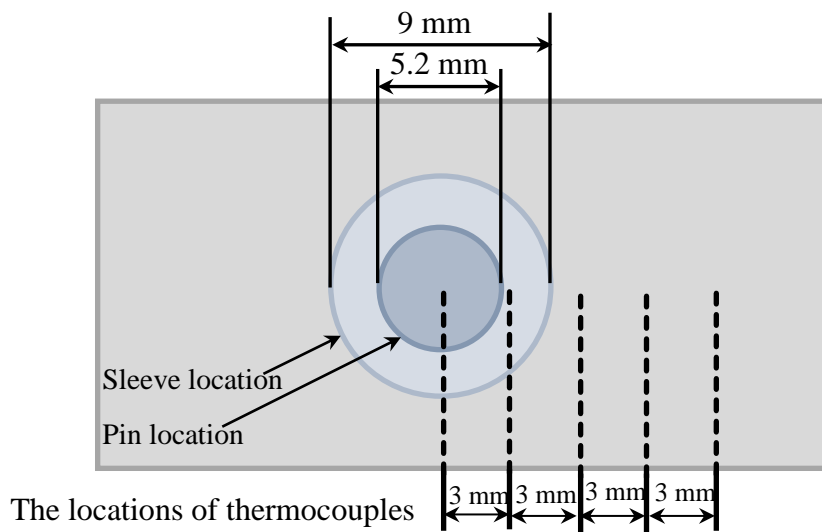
Schematic illustration of the different thermocouple locations for AA6111 similar aluminium alloy welding.
